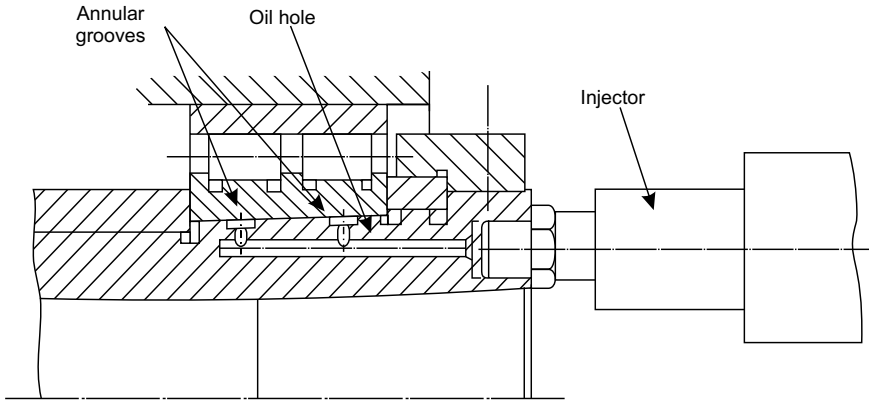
Schematic diagram describing the oiling arrangement to reduce friction at the bearing-spindle interface during bearing play adjustment
